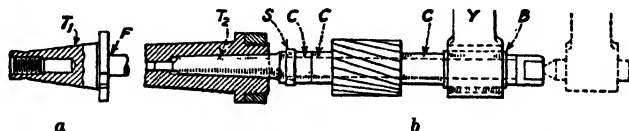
Milling-machine arbor: T_1 shows modern type of taper shank; T_2 , old type of taper shank. *F*, fillet, gives extra strength and stability; *S*, special collar to cover fillet; *C*, regular collars; *B*, special collar fits bronze bearing in yoke *Y*. The outer end of the arbor is threaded for a nut. In those machines (Brown and Sharpe, for example) where the cutter normally runs left-hand, the arbor and the nut are threaded left-hand, and thus the pressure of the cut does not tend to loosen the nut. Dotted lines show yoke center in end of arbor.
